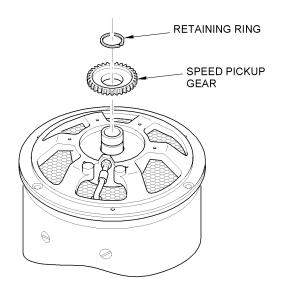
Installing Speed Pickup Gear and Retaining Ring onto Armature Shaft (Pre-Load)
